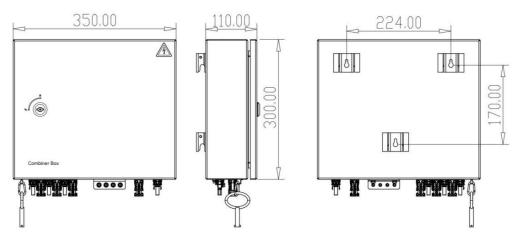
Dimensions of the CB-03A03S-A Combiner Box
